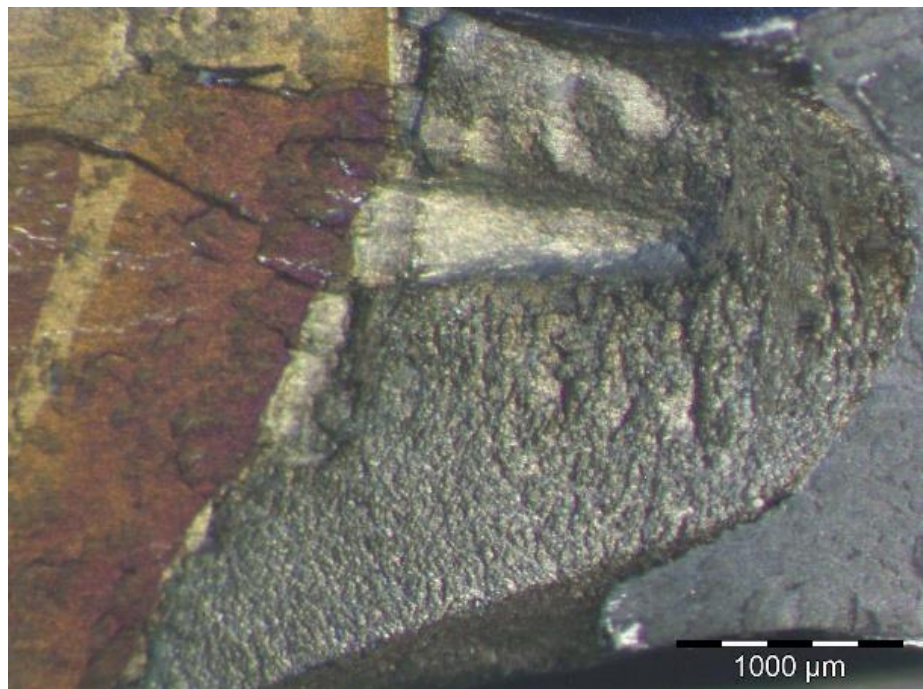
Stereo microscope image of crack surface after fracture testing for test temperature 262°C.
